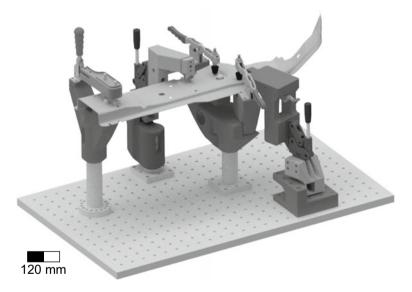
Larger welding jig as hybrid version with FFF elements
